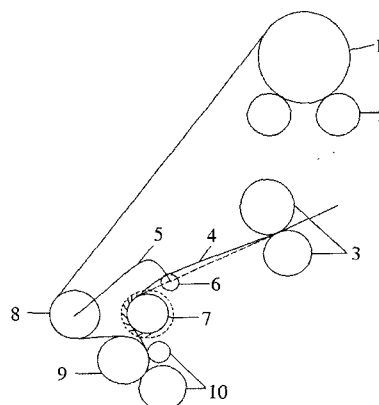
Schematic diagram of spinning process; 1. spandex package, 2. positive feed roller, 3. back roller, 4. wool roving, 5. cradle, 6, 8. V-groove guide wheel, 7. porcupine roller, 9. front top roller, 10. front bottom roller.
